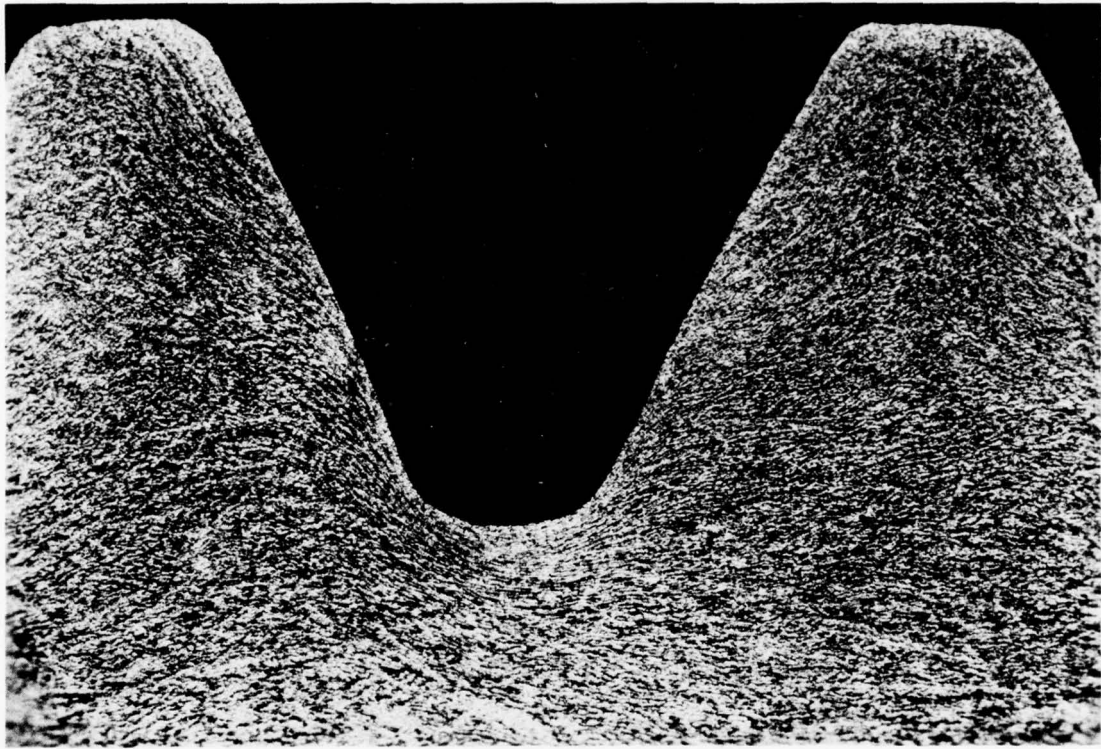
Cross-Section of Forged Tooth, Etched to Show Forging Flow Lines.
